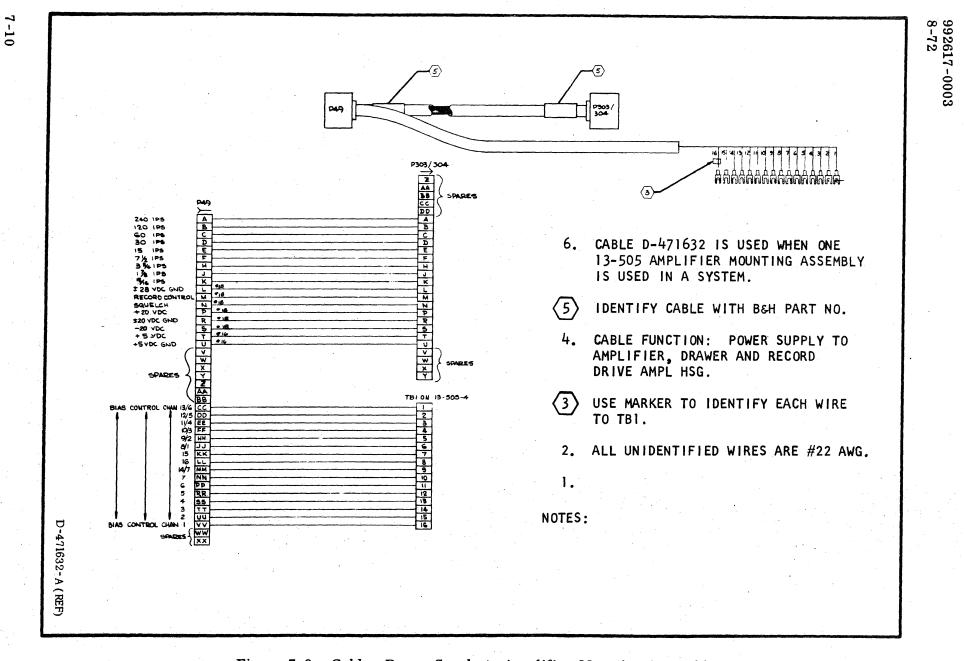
Cable, Power Supply to Amplifier Mounting Assembly and Record Head Driver Amplifier Housing
